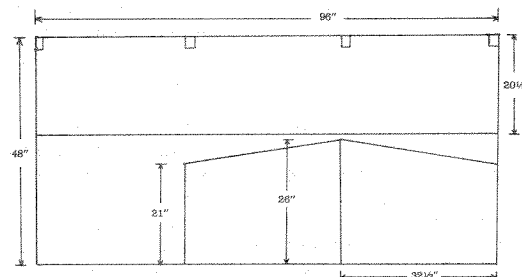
Plywood cutting layout showing dimensions for back and sides of hutch.
